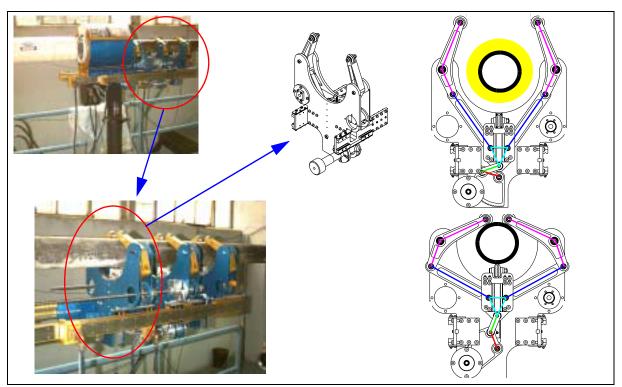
BOA's inch-worm locomotor & detailed view of open/close clamper positions
